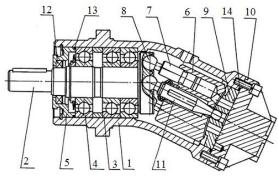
Non-regulable axial-piston hydro-machine with inclined block of cylinders.1 – housing; 2 - shaft; 3 - angular contact bearing; 4 - radial bearing; 5 - cap; 6 - block of cylinders; 7 - piston; 8 - piston-rod; 9 - distributor; 10 - cap; 11 - central tenon; 12, 13, 14 - seals. overall dimensions and weight. Hence, to define whether choice or change of these parameters is expedient one should take this into account jointly with changes associated with manufacturing of an APH housing and shaft.
